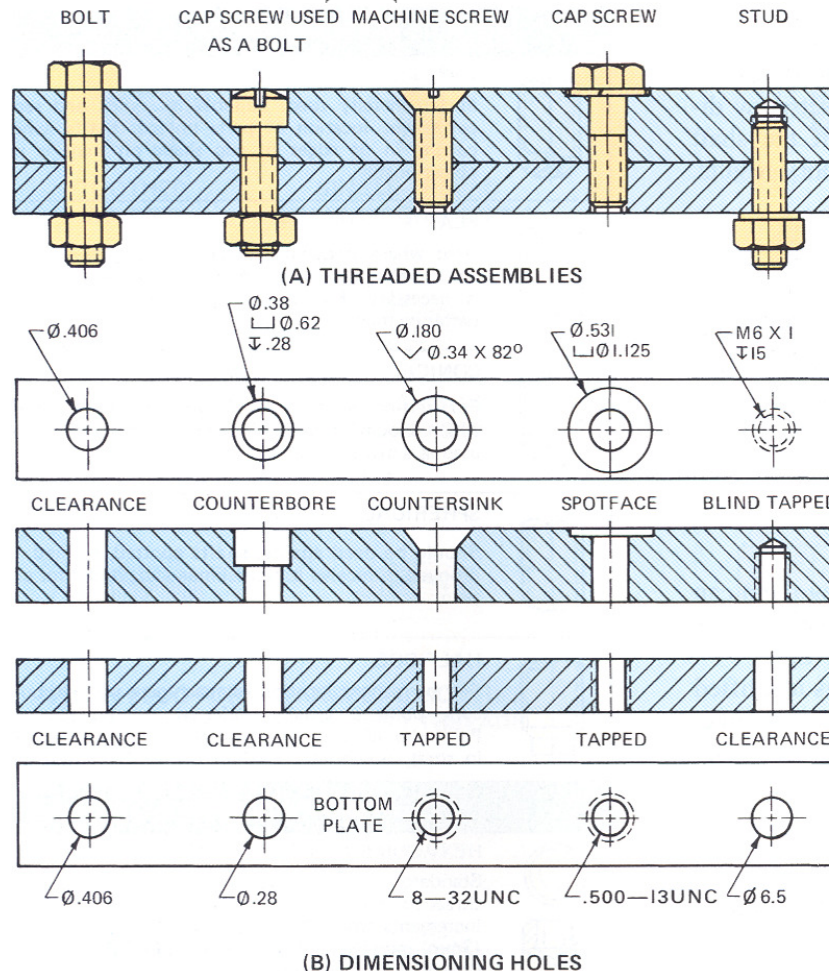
Specifying Threaded Fasteners and Holes
